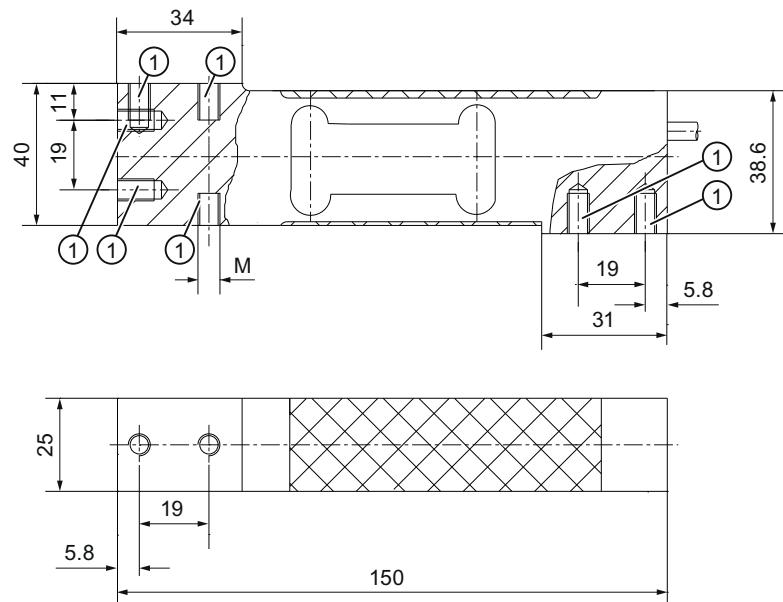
SIWAREX WL260 SP-S AA dimension drawing
